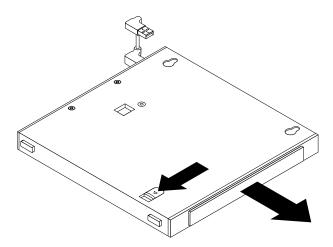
Removing the secondary hard disk drive adapter from the optical drive box
